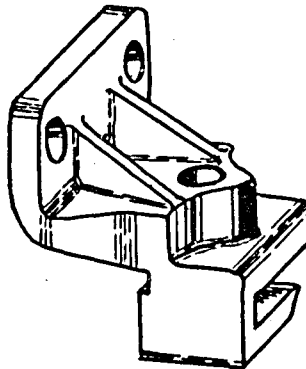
IMPROVED Y LAYOUT SPREADER BRACKET
